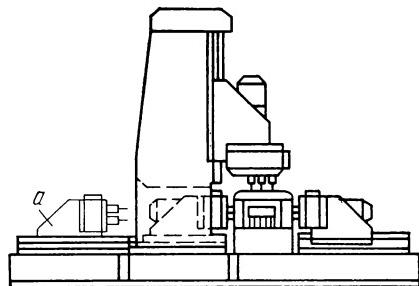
Three-way multiple-spindle drilling machine with an arch-type column
